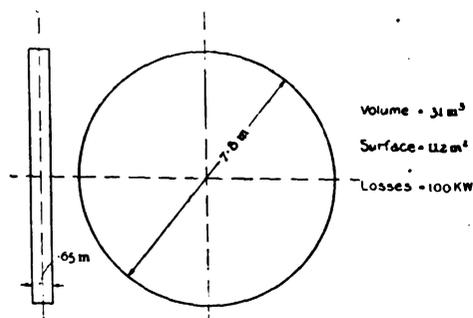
OVER-ALL DIMENSION OF LOW-SPEED MACHINE.
